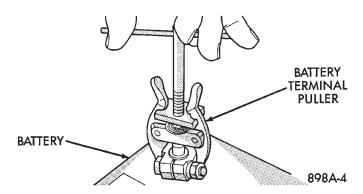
Remove Battery Cable Terminal Clamp - Typical
